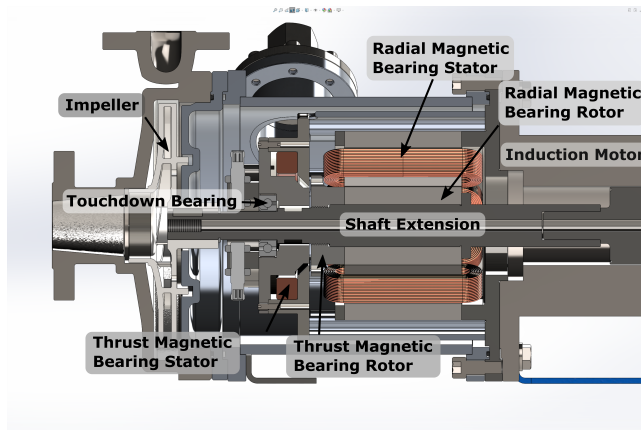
Closer view of the combined front thrust and radial magnetic bearings.
